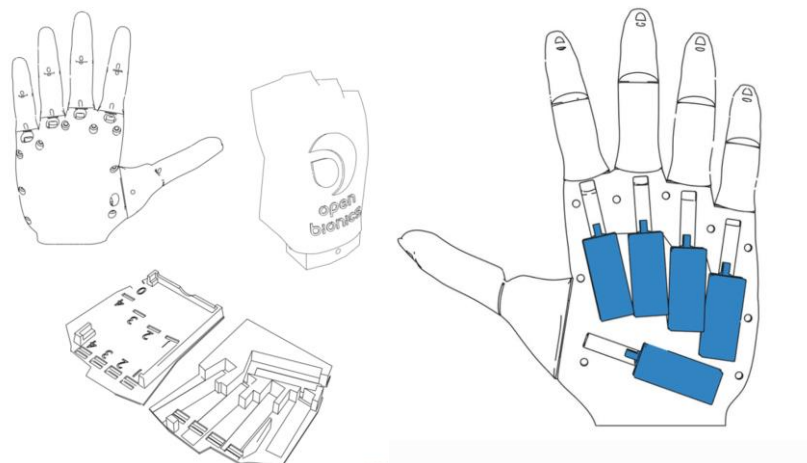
Ada hand structure (left), and the linear motor layout inside the palm (right) [71]
